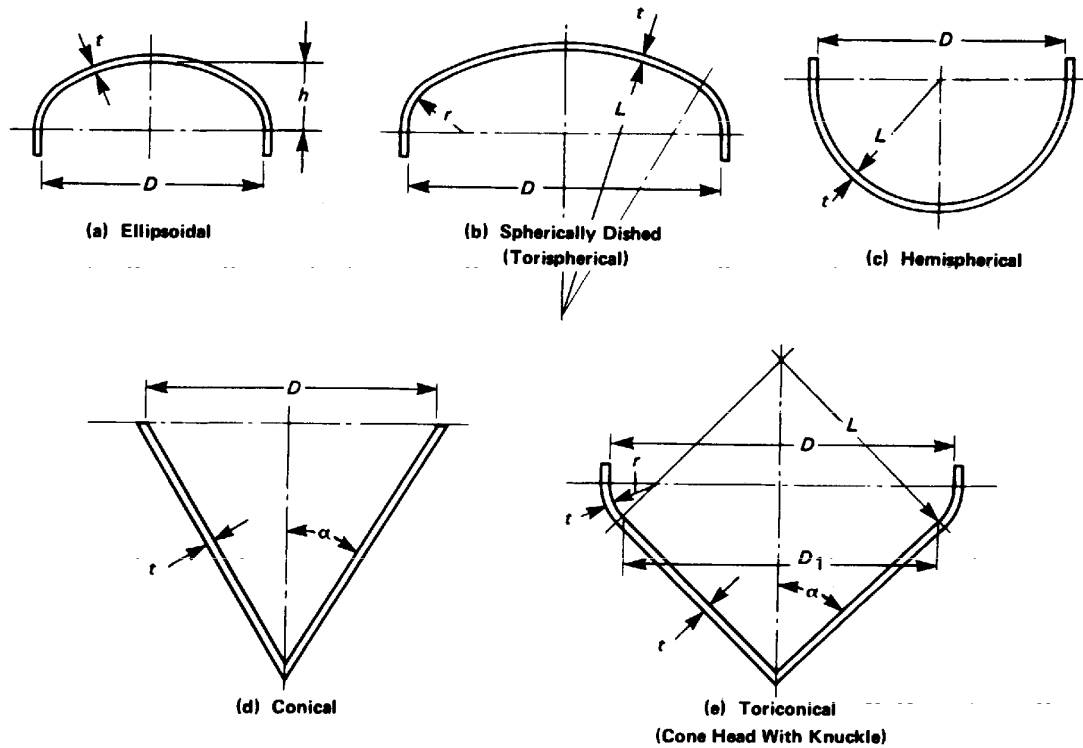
PRINCIPAL DIMENSIONS OF TYPICAL HEADS
